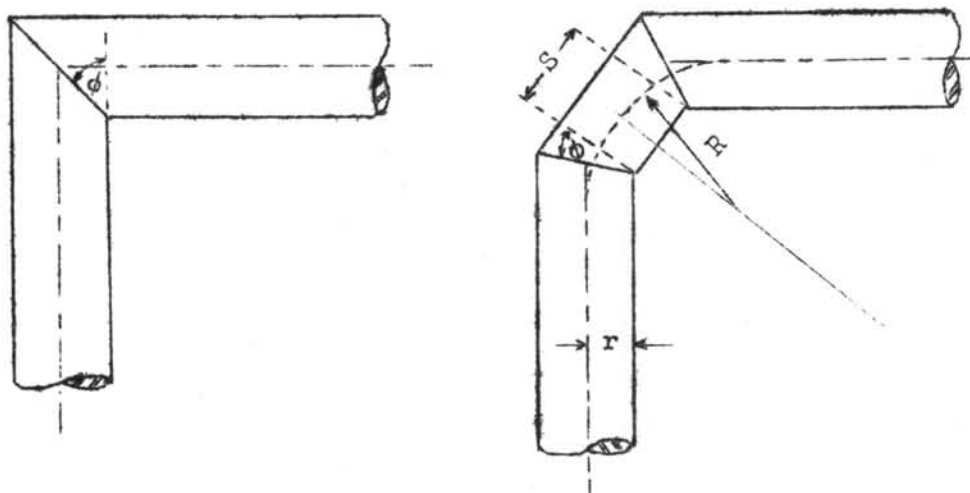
SINGLE AND DOUBLE MITERED BENDS
